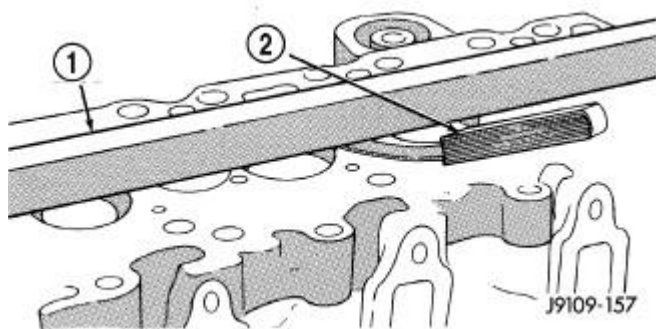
Inspecting Cylinder Head Combustion Deck Face For Warpage
